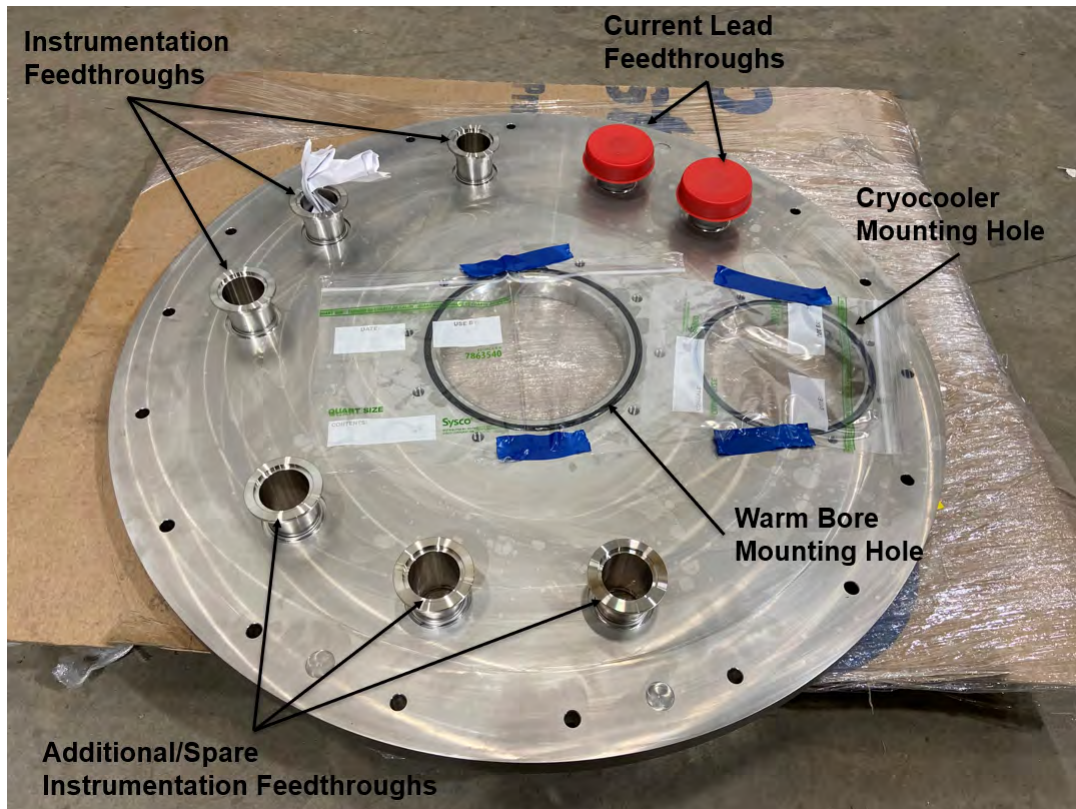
Picture of the primary flange which mates the coil hanging assembly to the testing Dewar.
